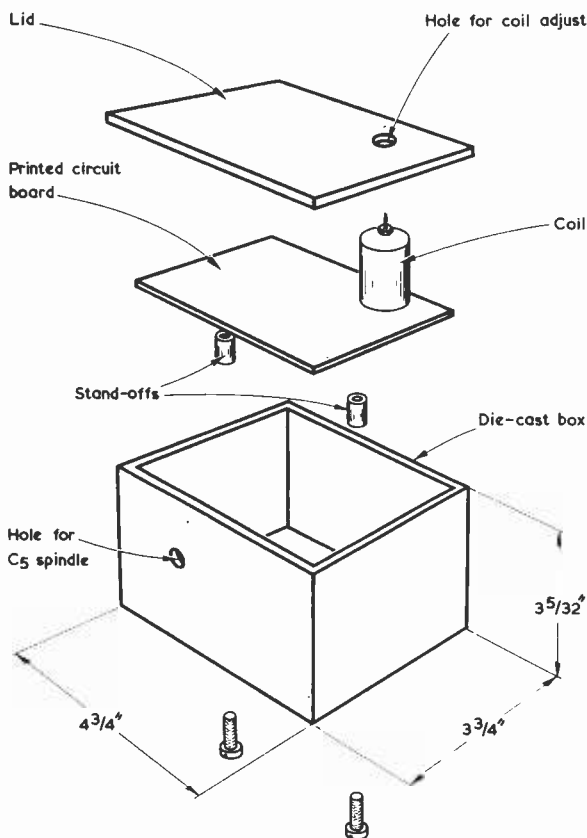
How the v.f.o. printed circuit board is fitted in the die-cast box
